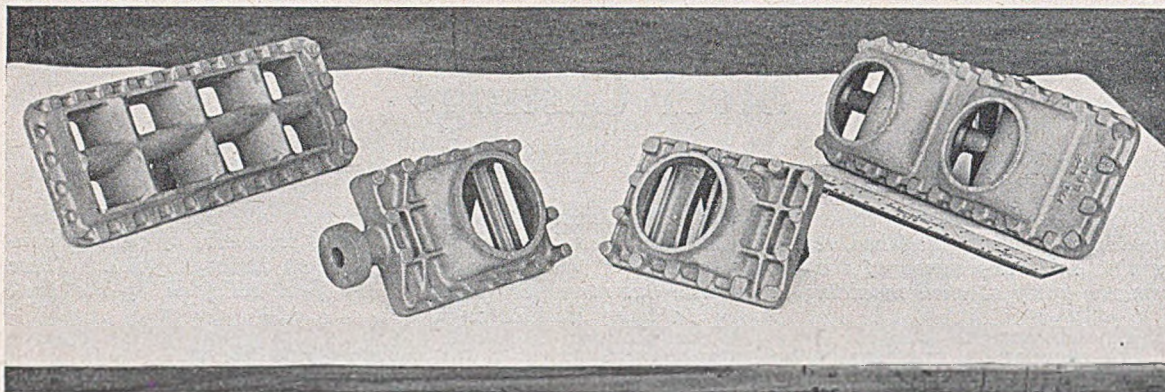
Shell-moulded Steel Castings incorporating Thin Sections and Fine Detail.
